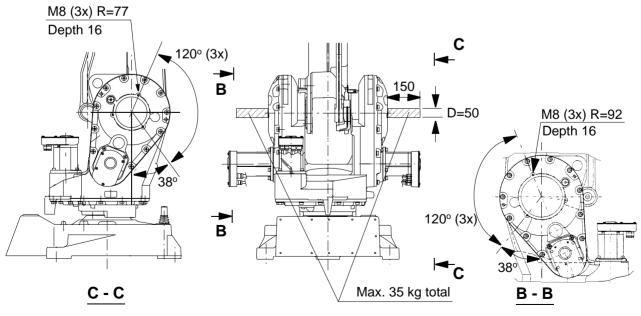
The shaded area indicates the permitted positions (centre of gravity) for any extra equipment mounted in the holes (dimensions in mm).
